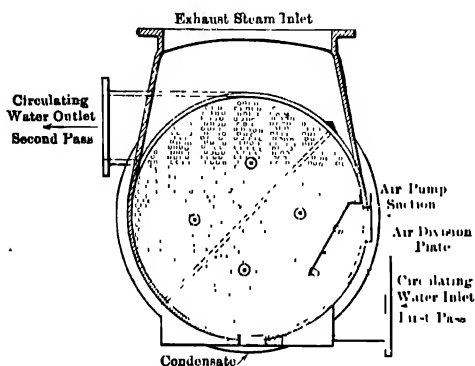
Tube Layout — Alberger "Spiroflo" Condenser.
